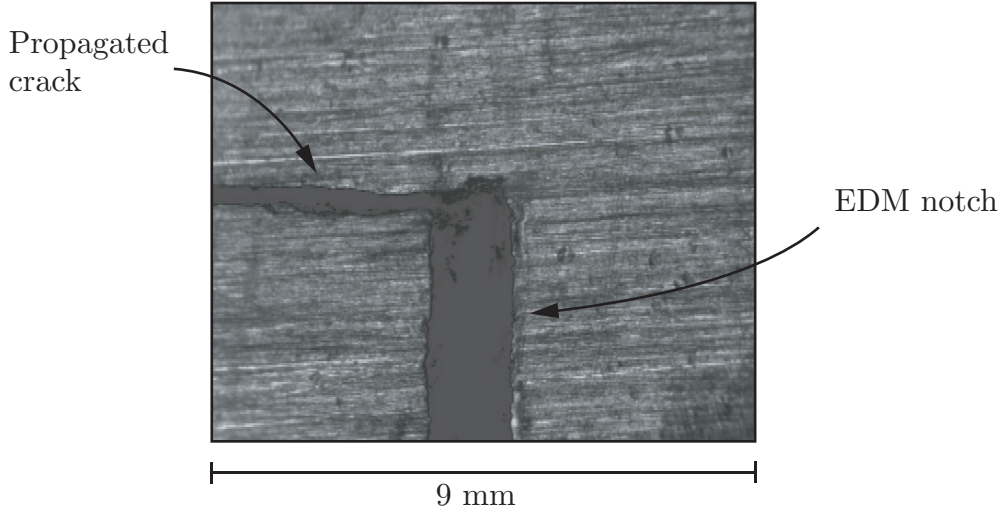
Magnified photo ($\times 100$) of a fractured specimen showing initial perpendicular crack growth
